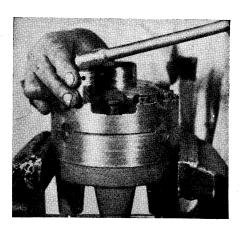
Take out differential case bolt lockwire and remove bolts, noting the short bolts between spider arms
